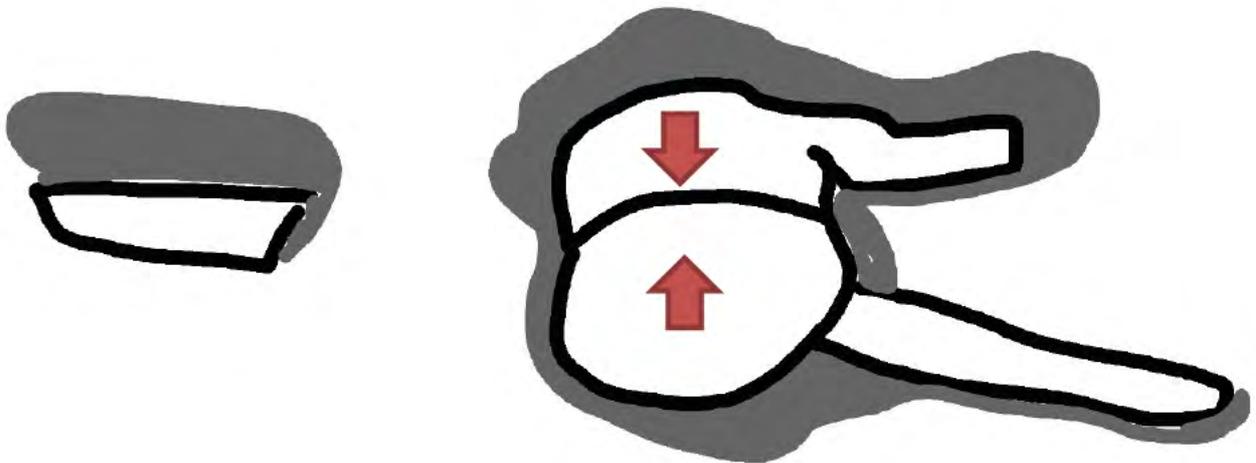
Schematic of Rod 12 fracture. The large red arrows identify the general direction of fatigue crack growth.
